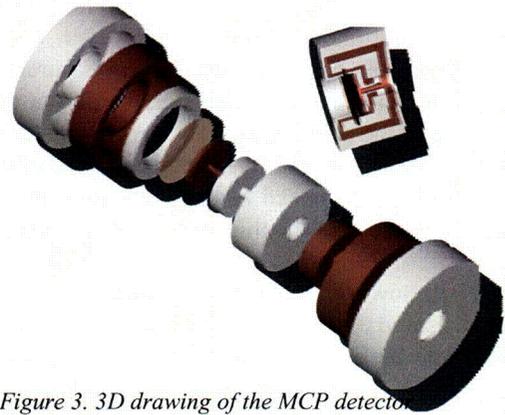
3D drawing of the MCP detector holder. The assembly was designed and manufactured at the Breazeale Nuclear Reactor machine shop.
